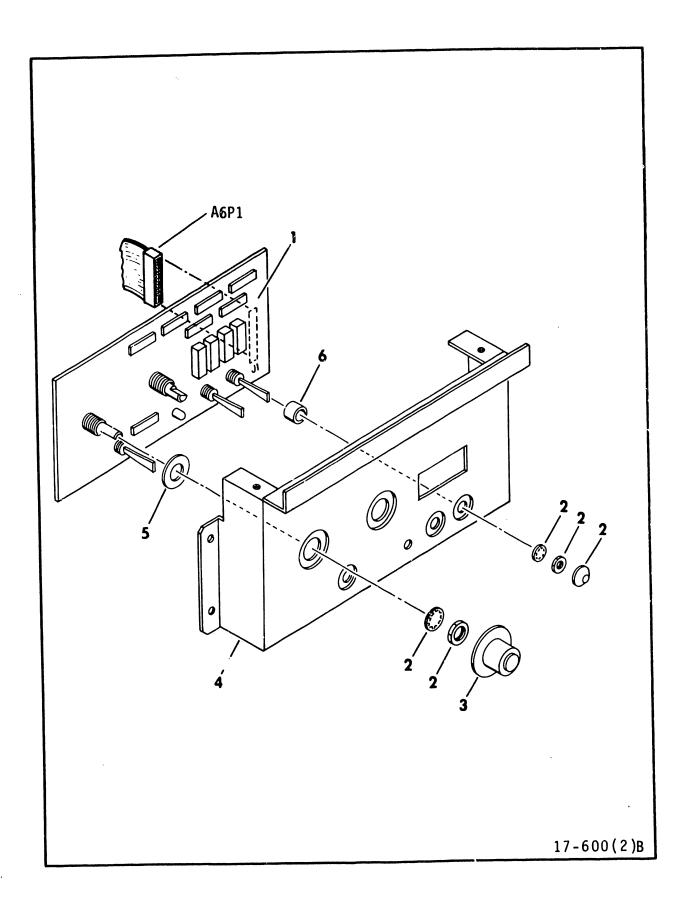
A-6. Diagnostic Panel Assembly (Sheet 2)
